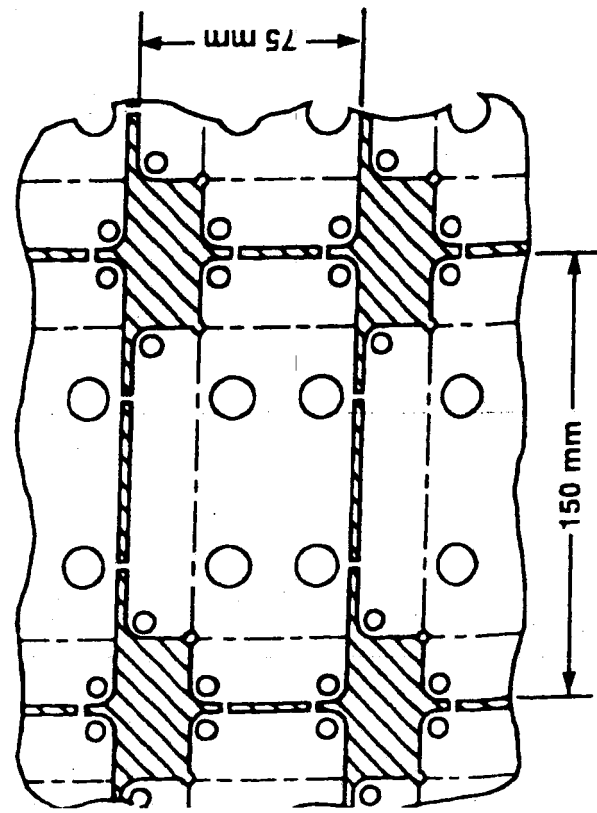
Layout of parts produced by turret press. (---) Subsequent bend lines.
